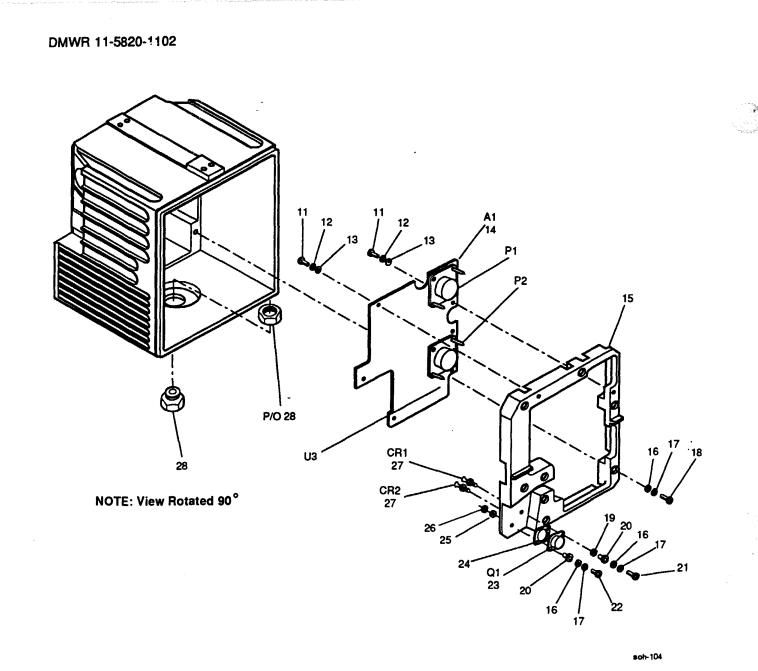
Housing Assembly (Sheet 2 of 2)
